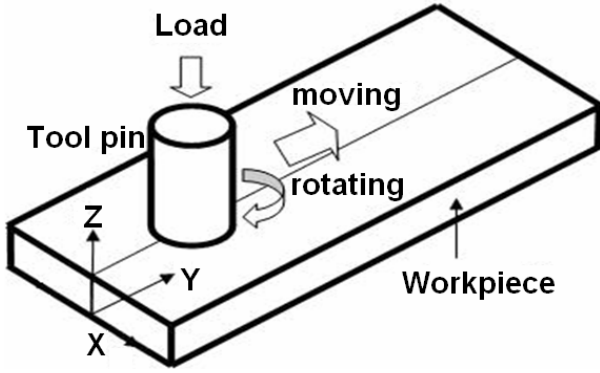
Illustrated schematic drawing of Friction Stir Welding.
